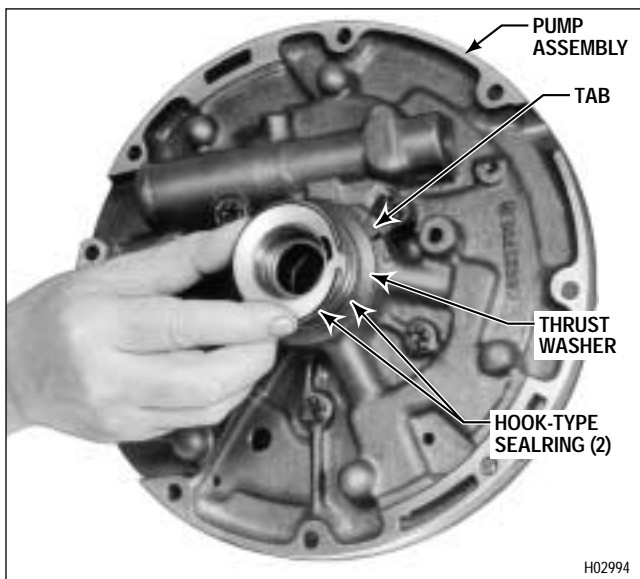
Installing Hook-Type Sealrings Onto Oil Pump Assembly
